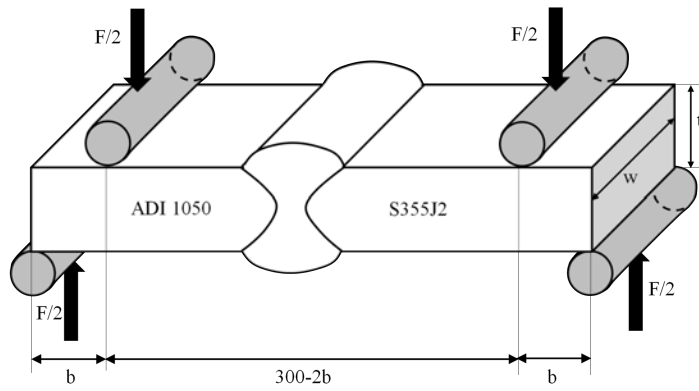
Geometry of the full-penetration butt joint under bending load
